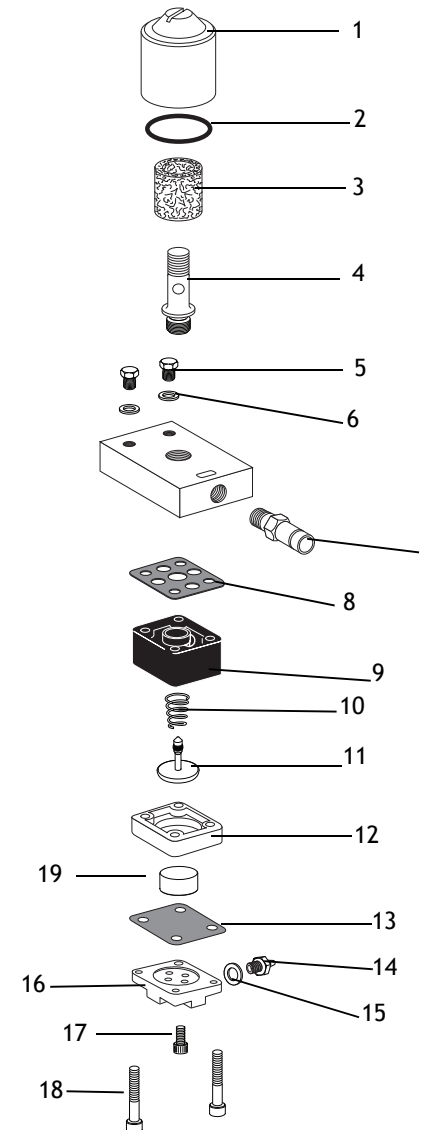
Air and Water Filter/Regulators Body Assembly Components
